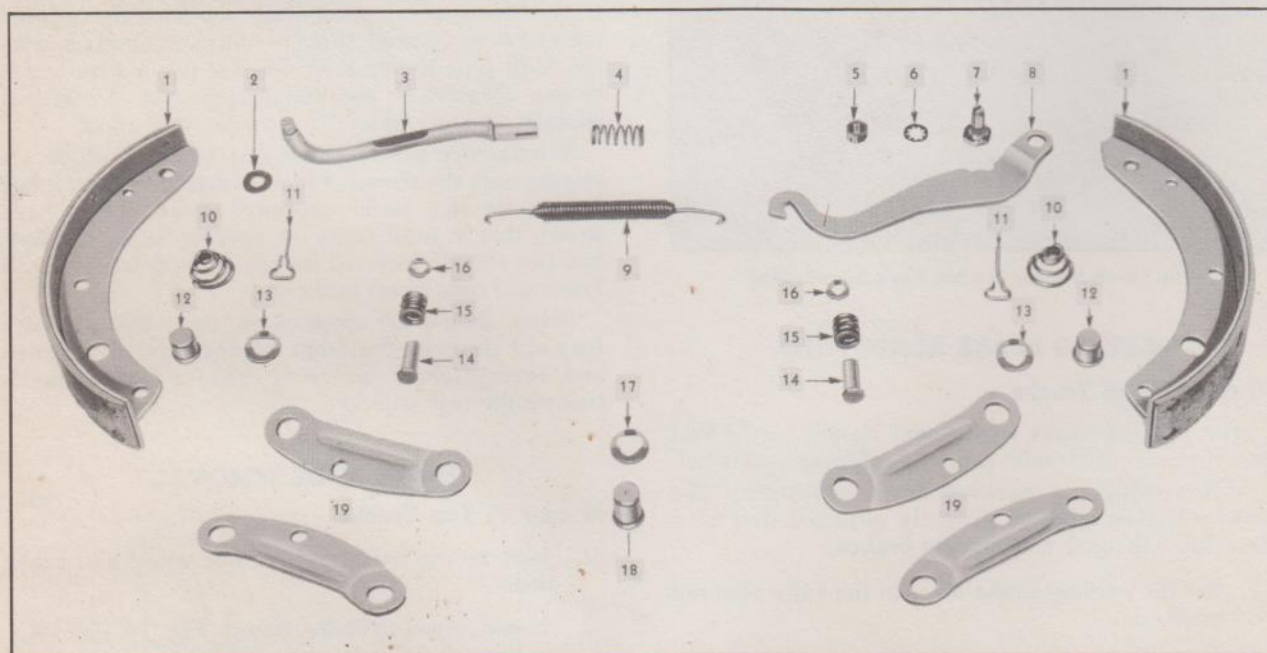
Layout of Rear Wheel Brake Parts—1/2 and 3/4-Ton Trucks
